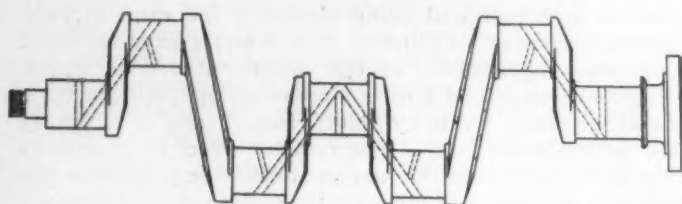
CRANKSHAFT IN WHICH OIL-HOLE LOCATION COULD BE CHANGED FOR THE EXPERIMENTS
